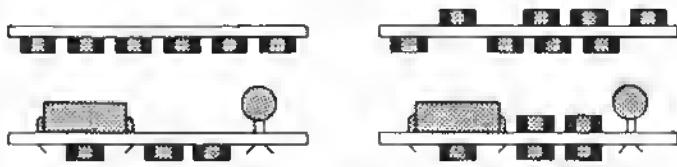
Surface-mounted components can be mounted on or below the printed circuit boards
